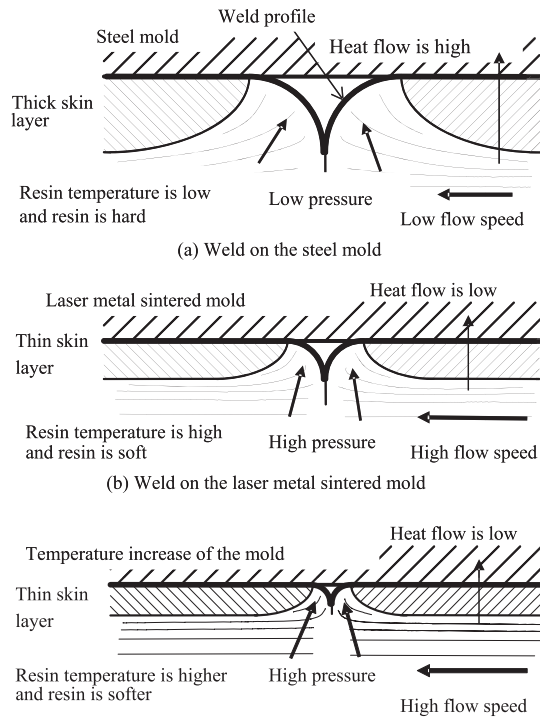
Image of the difference of weld formations among steel mold, laser metal sintered mold and that with hot air supply
